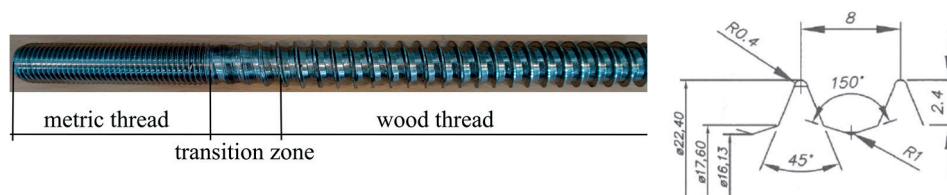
Purpose-made LTR with the geometry of the wood thread (dimensions in mm)
